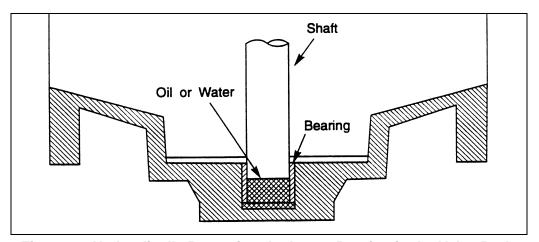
Hydraulically Removing the Lower Bearing in the Valve Body
